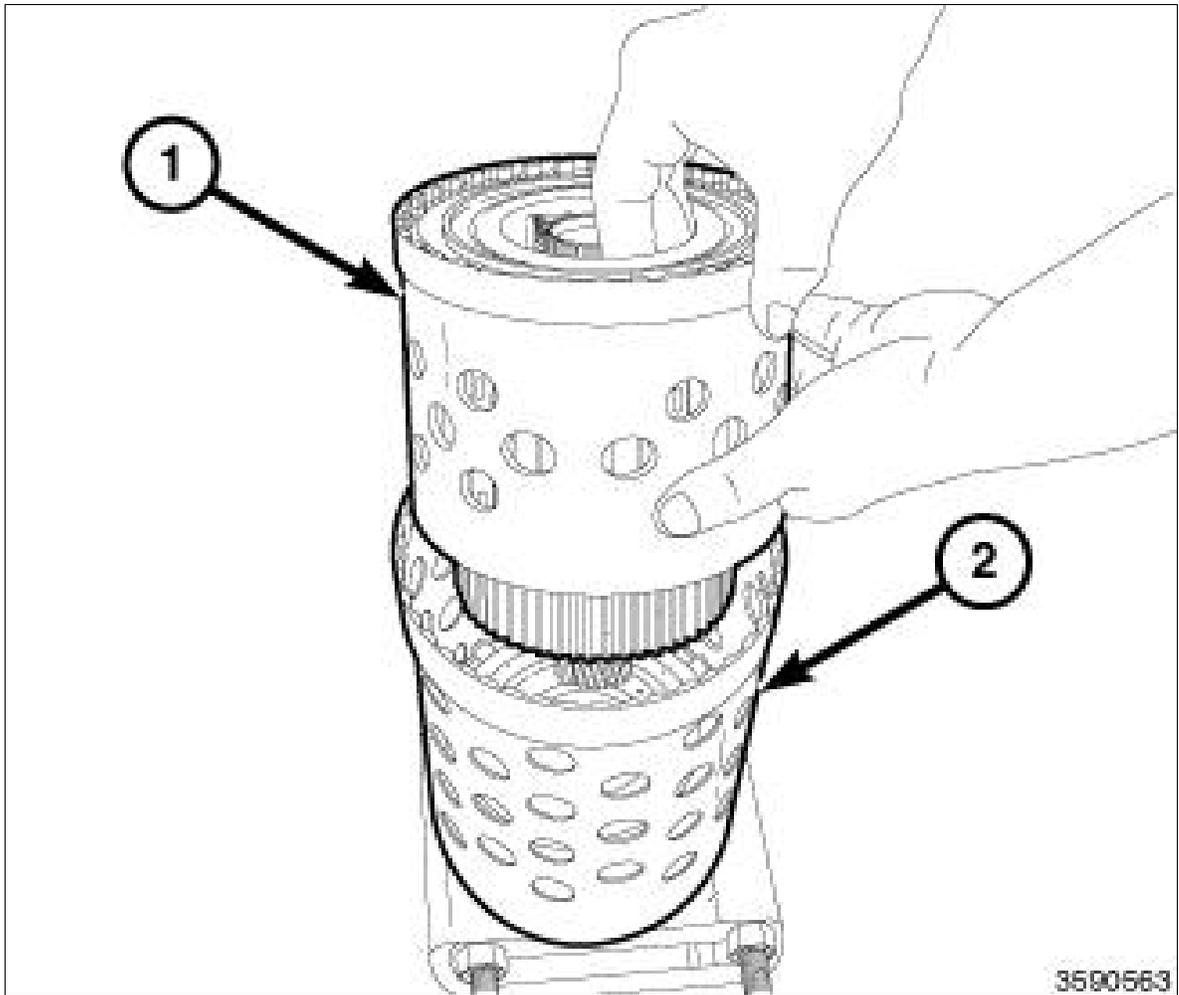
P2 Annulus/P3 Sun Gear & Drum Assembly
